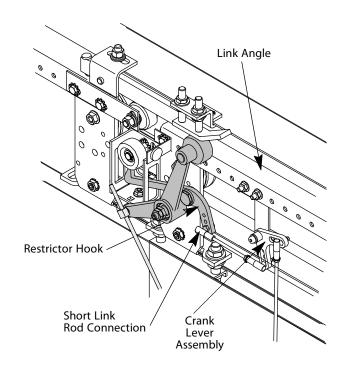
Attach Short Link Rod Assembly to Restrictor Hook
